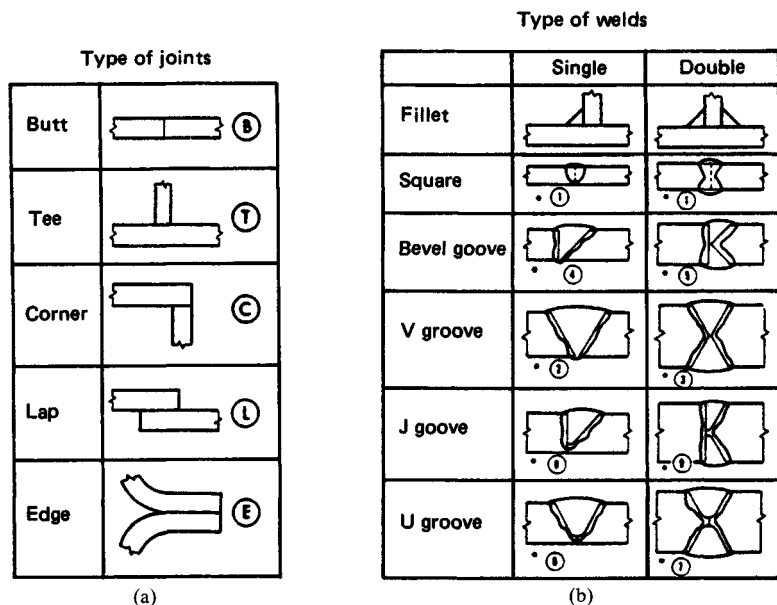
(a) Joint design; (b) weld grooves. (*The Lincoln Electric Company.*)
